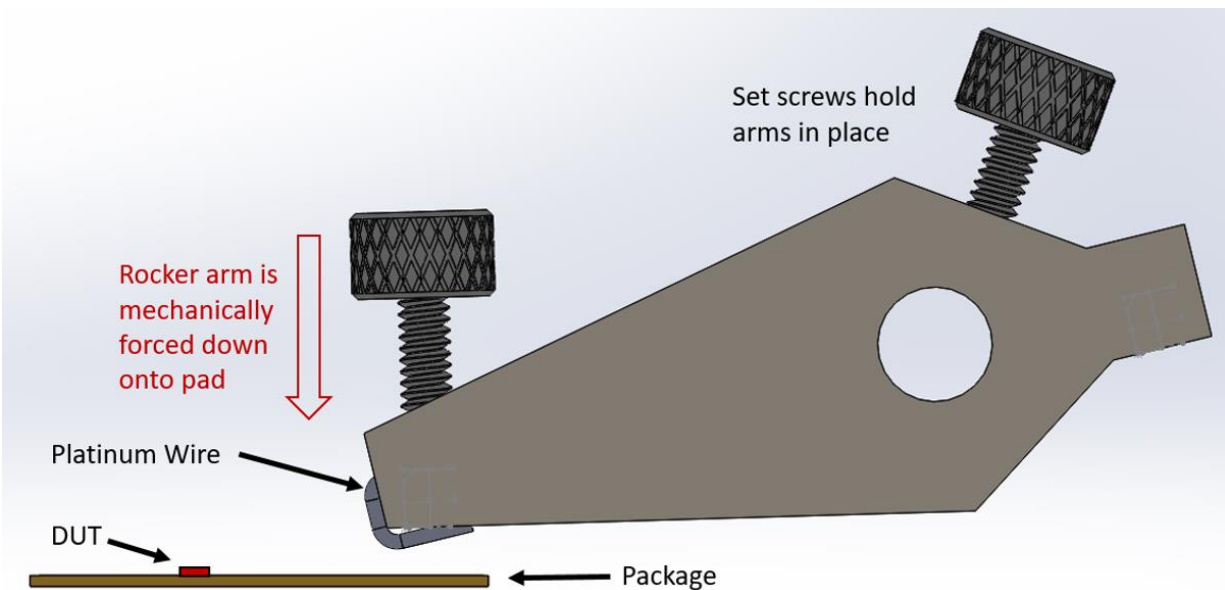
A CAD illustration of how the rocker arms make electrical contact with the packaged part.
